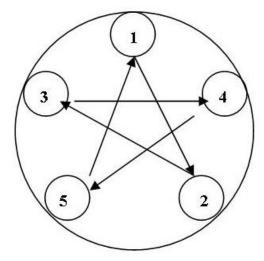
With a 5 lug bolt configuration, torque each nut to 35 ft. lbs.—following the pattern above.
